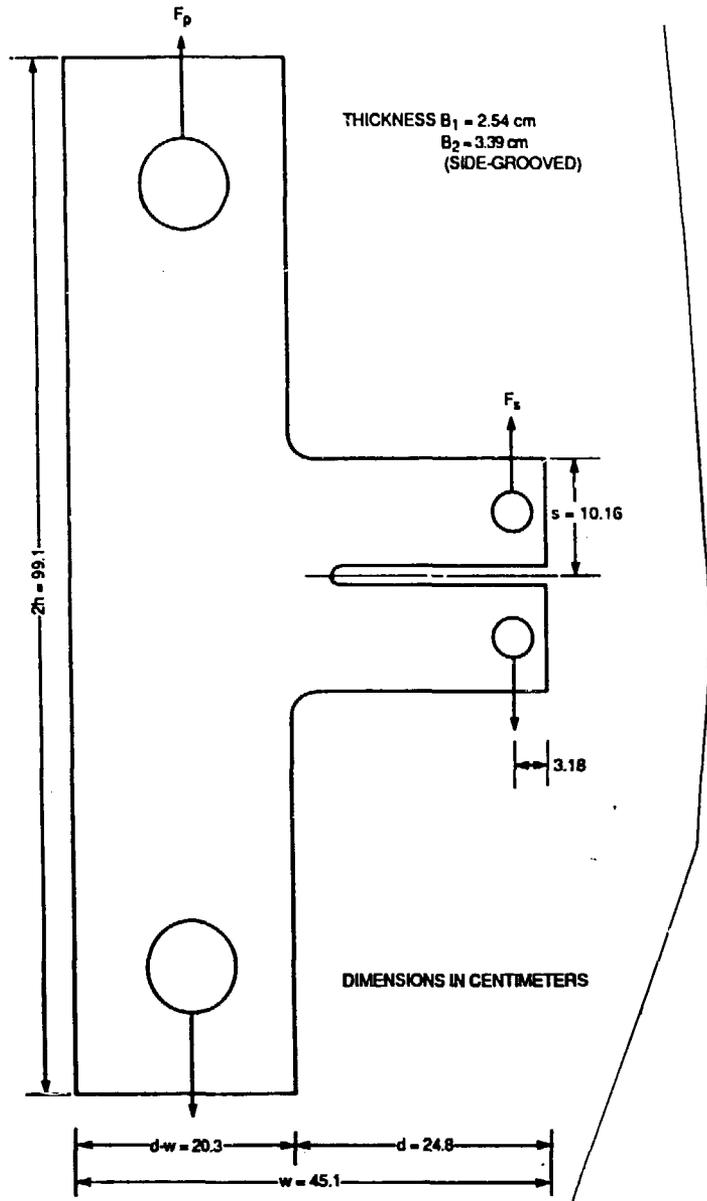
Geometry and loading system of stub-panel crack-arrest specimen.
